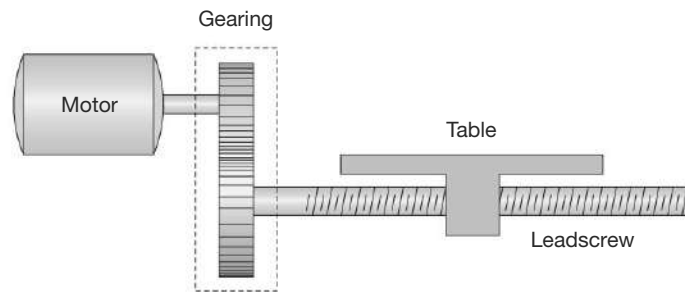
Principle of operation of the control of axis motion in an NC machine tool
